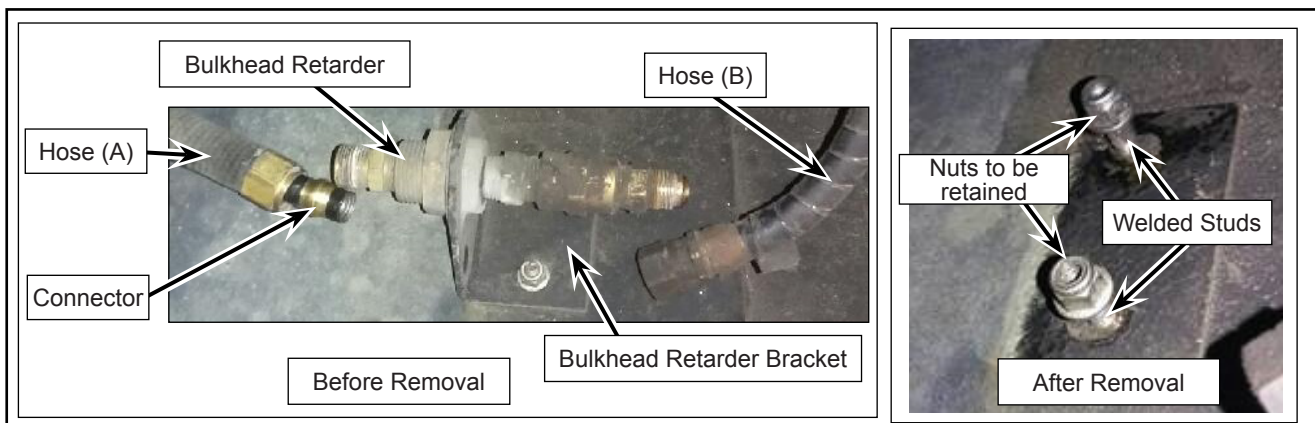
Before and After Removal of Bulkhead Retarder Assembly
